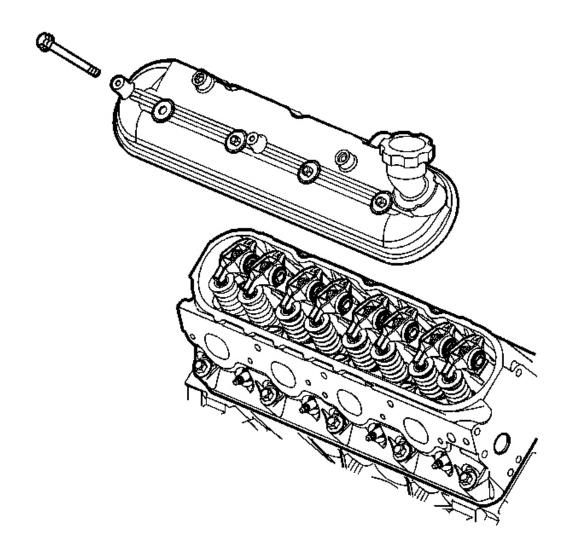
View Of Valve Rocker Arm Cover & Bolts (Right) Courtesy of GENERAL MOTORS CORP.
